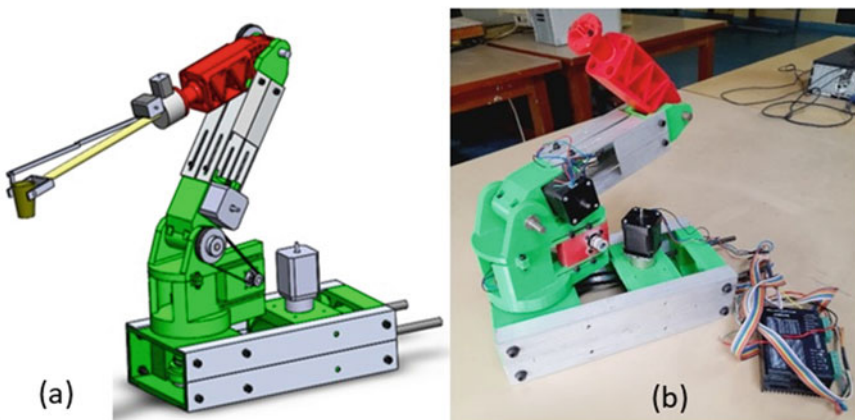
3-link robotic manipulator a CAD design b manufactured robot
